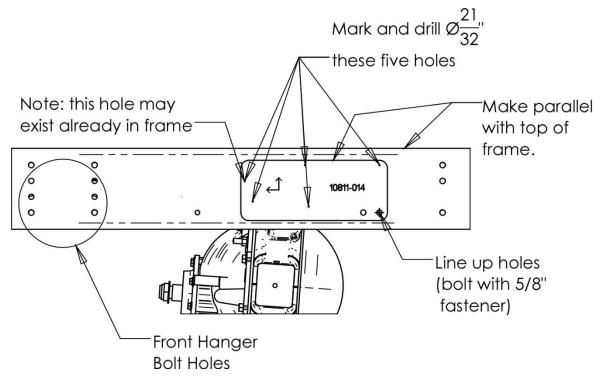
Driver Side Upper Strut Mount Frame Drilling
